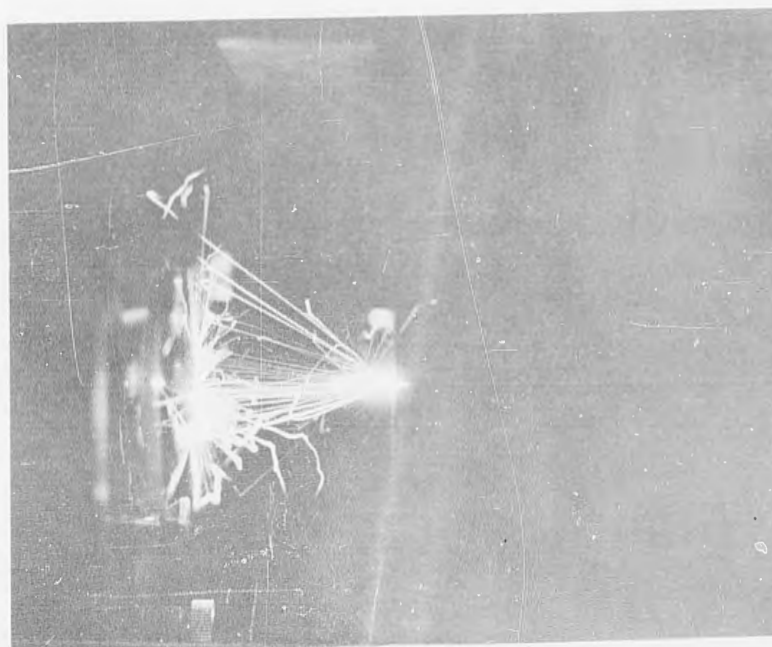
LASER punching hole through 1/16" aluminum sheet.
